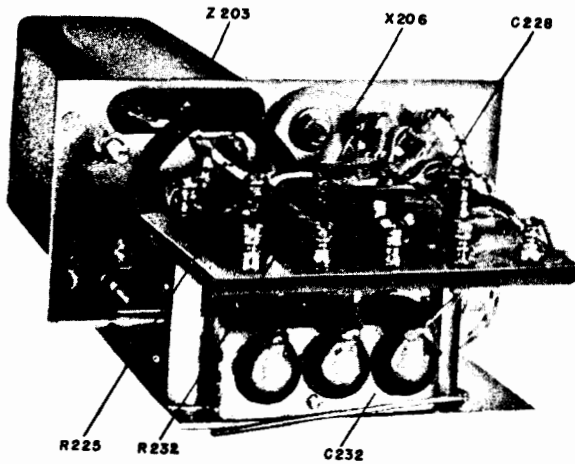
Receiver 3rd I-F Assembly, Bottom View
